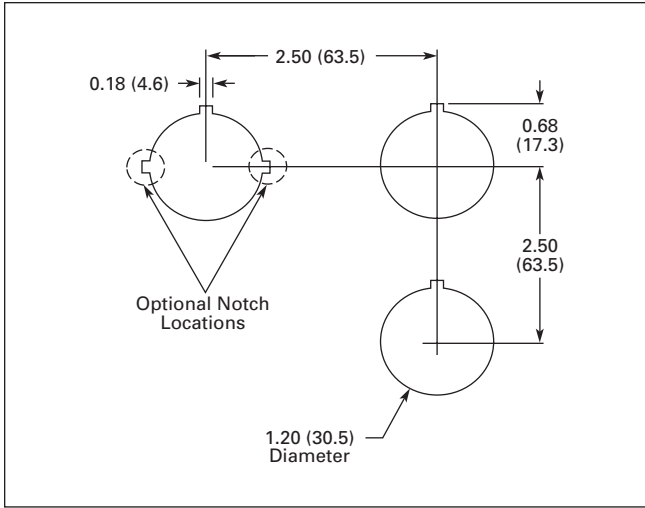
Mounting Matrix and Minimum Panel Spacing Requirements in Inches (mm)
